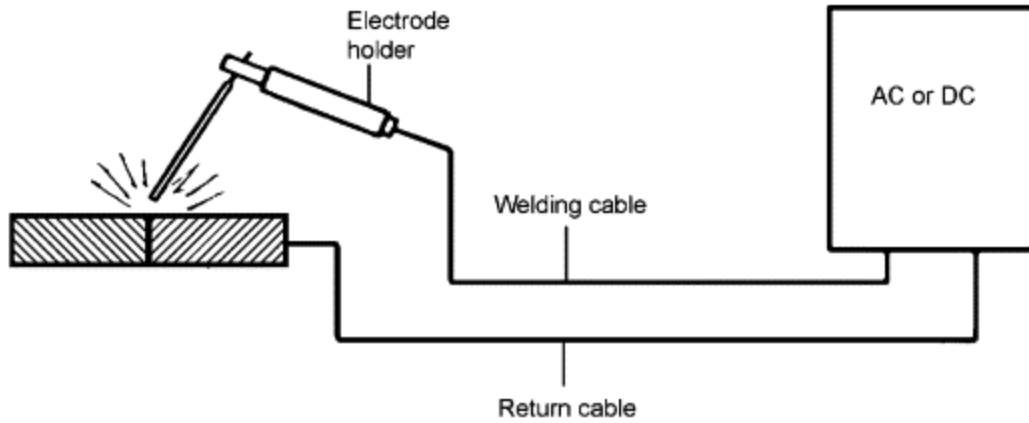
Schematic diagram of Shielded metal arc welding process (Weman, 2012).
